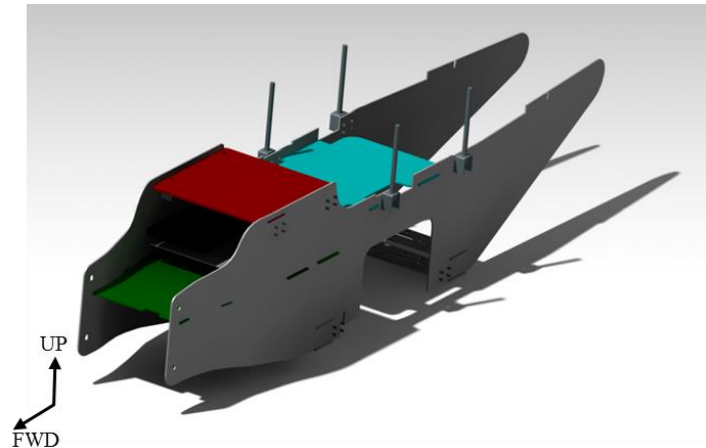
CAD model of the fixed-wing UAS fuselage subassembly
